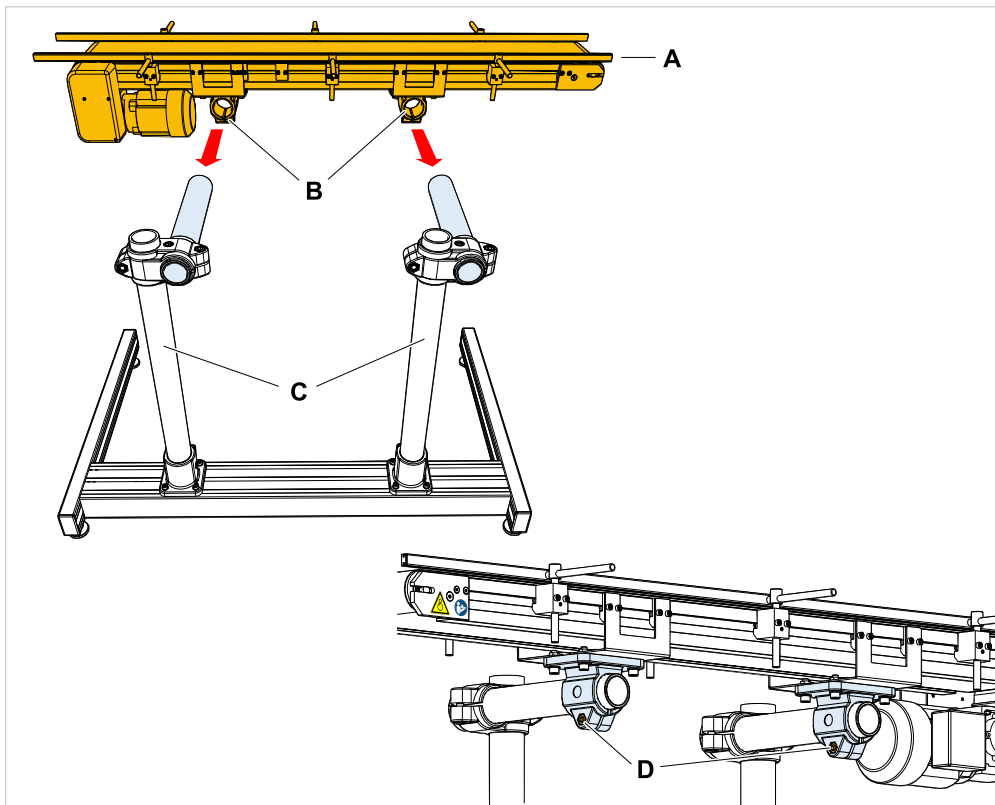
Installation example for B conveyor (A = Belt conveyor, B = Clamps for alignment and fixing of the belt conveyor, C = Support stand, D = Clamping bolts).
